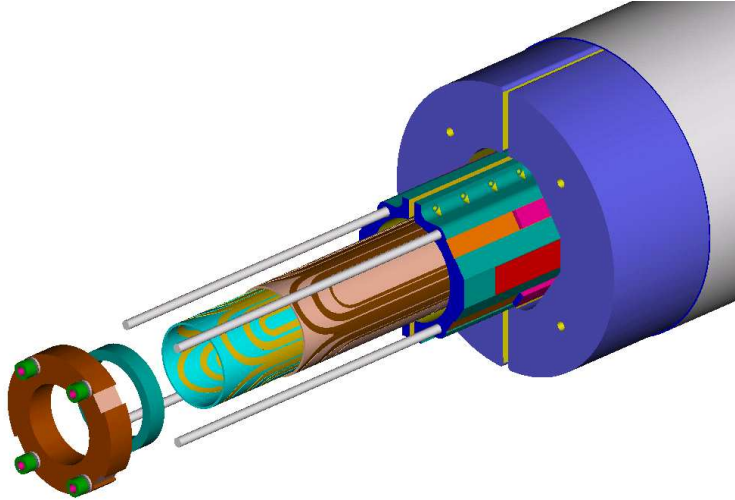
(Color) Exploded view showing the two quadrupole layers (dipole coils not shown).
